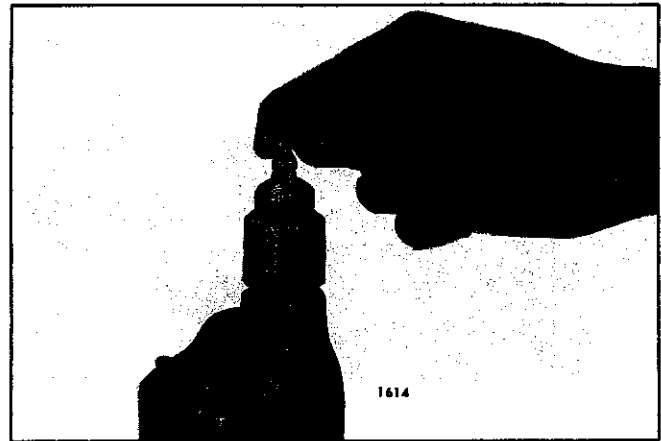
Lapping Edge of Hole in Valve Seat Using Tool J 7174
